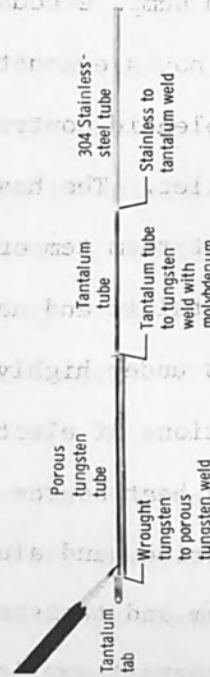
Porous Tungsten Ion Engine Emitter Assembly
